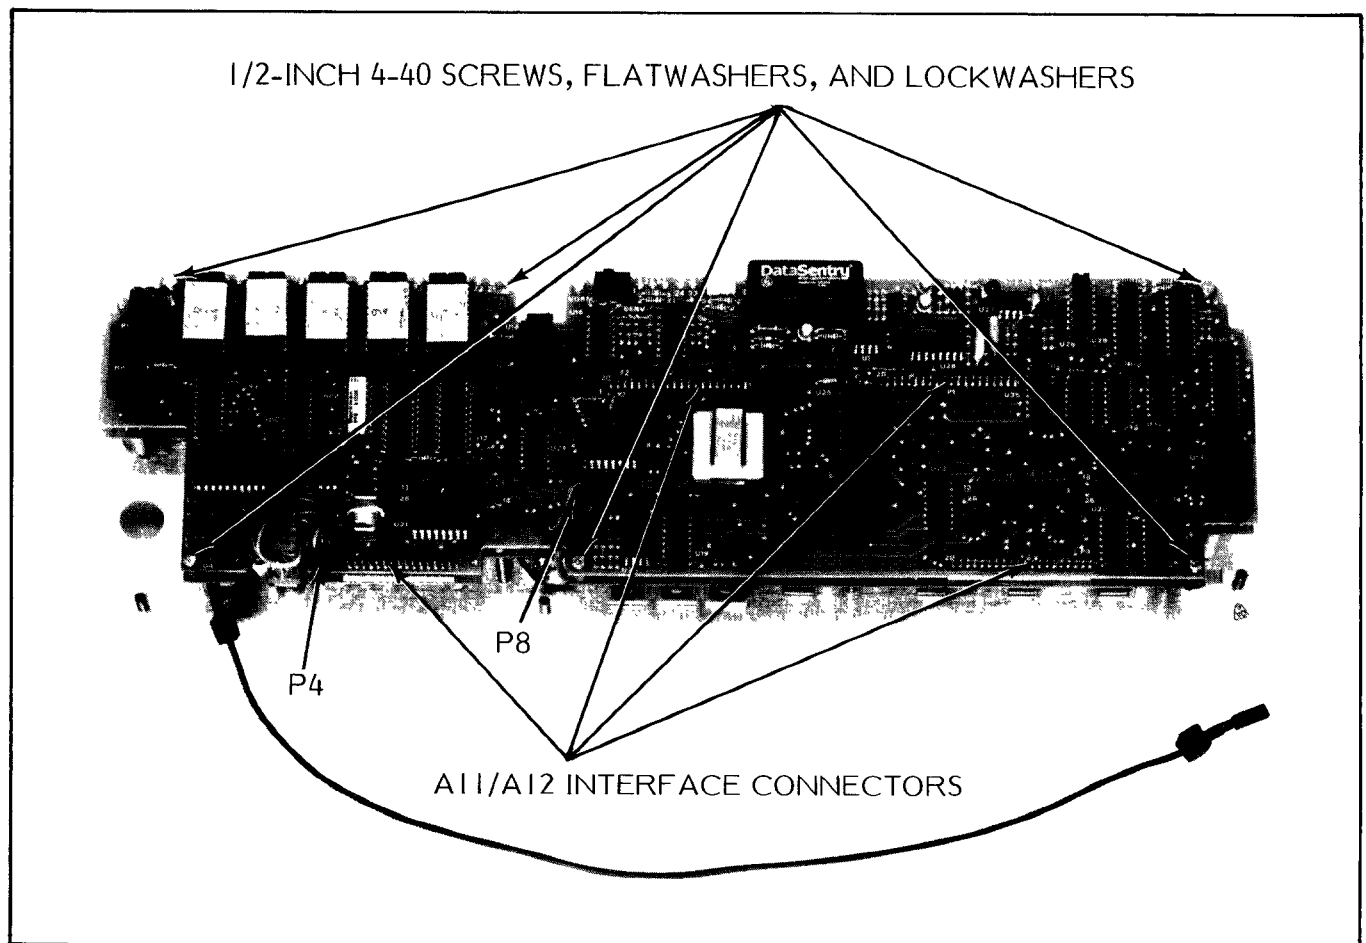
6600 Series Programmable Sweep Generator, Front Panel Assembly
